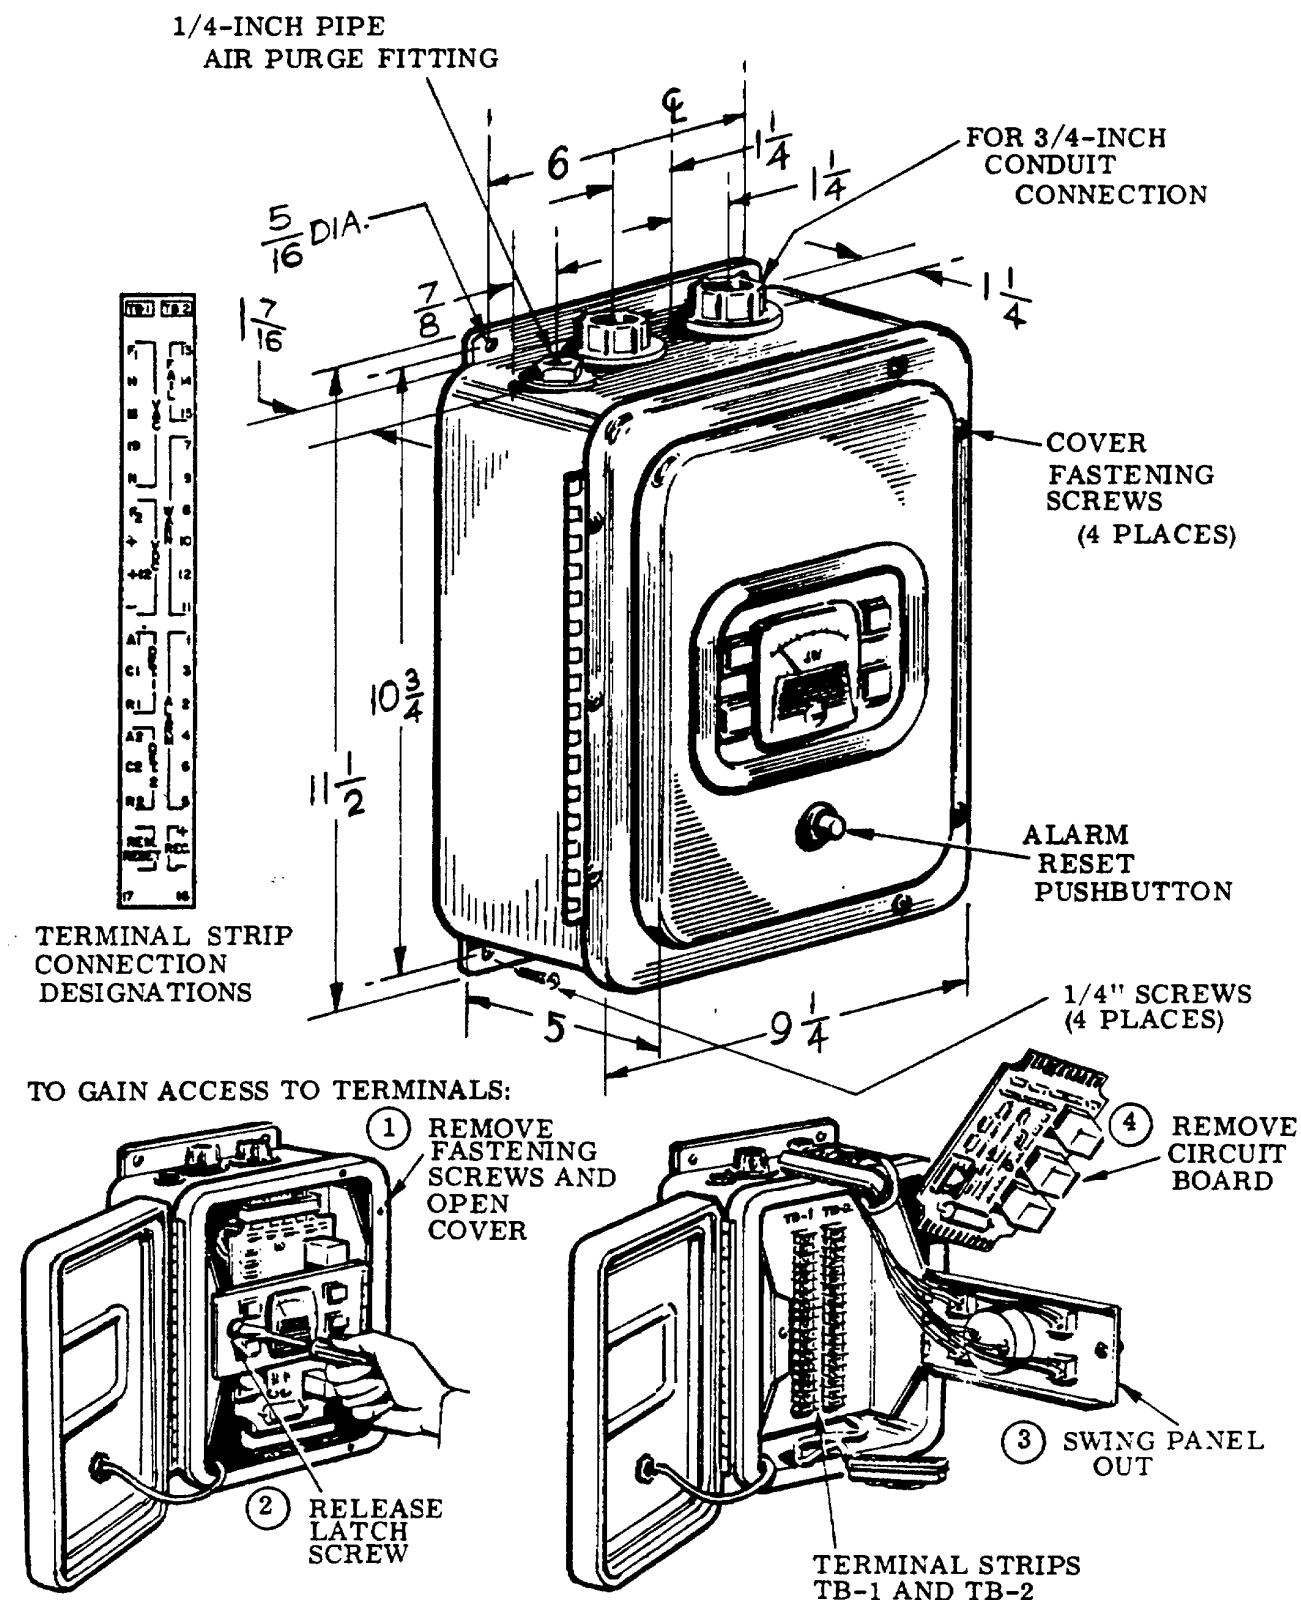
CD800W and 802W Wall-mounting Cabinet Installation
